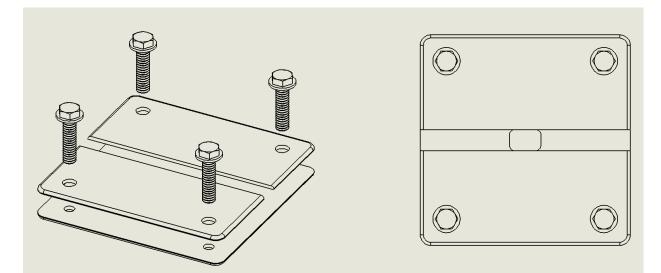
Diagram of custom clamp for fabrication of nerve cuff electrodes. Shown are the exploded view (left) and top orthographic view (right). The bottom plate and two top plates are made of 6061 aluminum alloy with ANSI 1/2" #5-40 bolts. Dimensions are adjustable as needed. This image was made with a bottom plate of 2" x 2" x 0.04" and a square pocket cut in the center at 4 mm x 8 mm.
